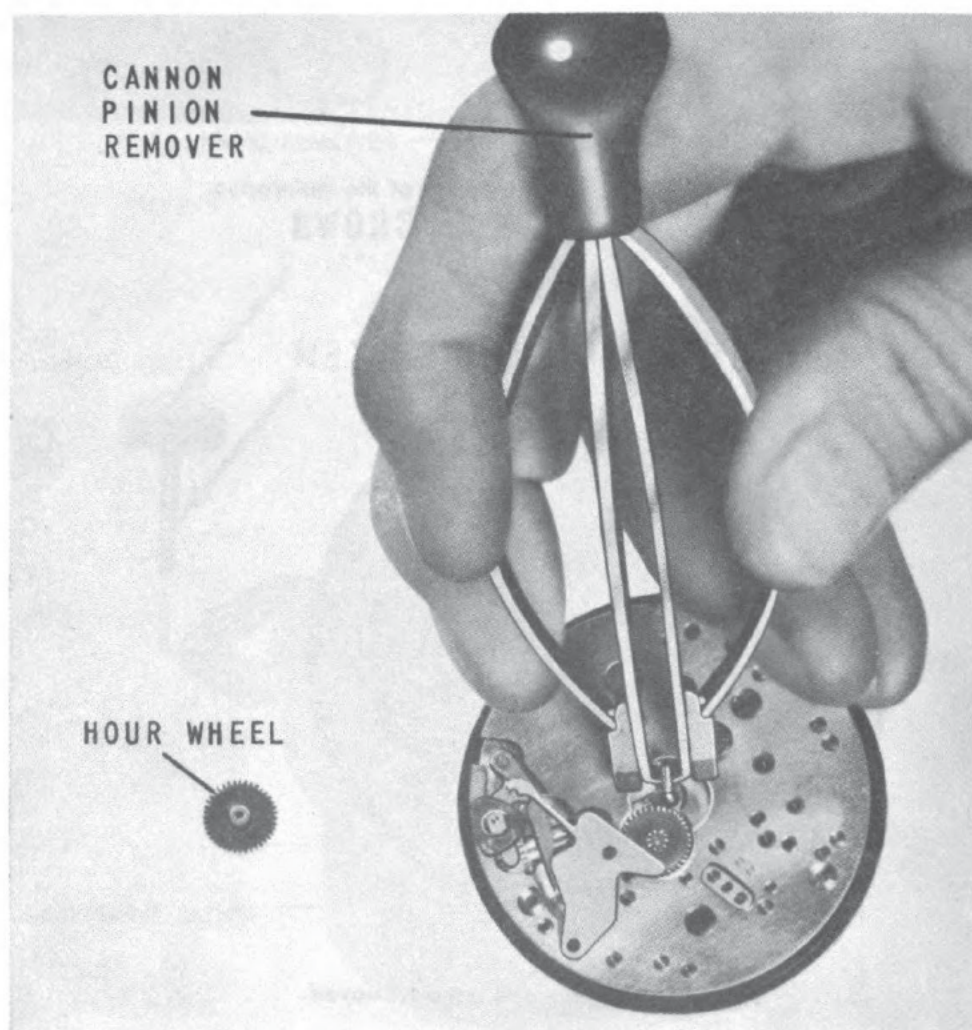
Removing the cannon pinion. Hour wheel removed.
